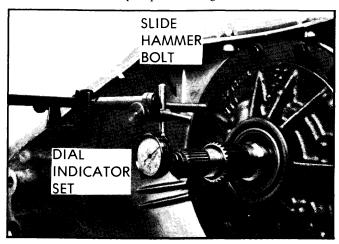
Checking End Play for Proper Thrust Washer Selection
